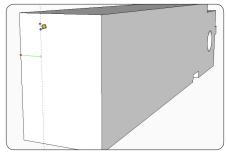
Placing a Parallel Guide Line for a cutout on the end of the piece.
